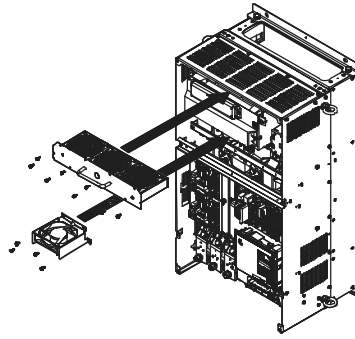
Installing the Cooling Fan Unit: 4A0414
